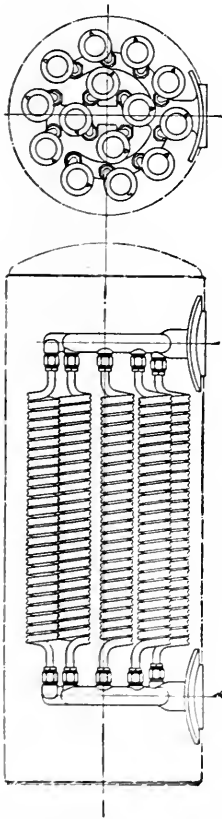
Plan and elevation of R. & D. Paracoil Feed Water Heater.
